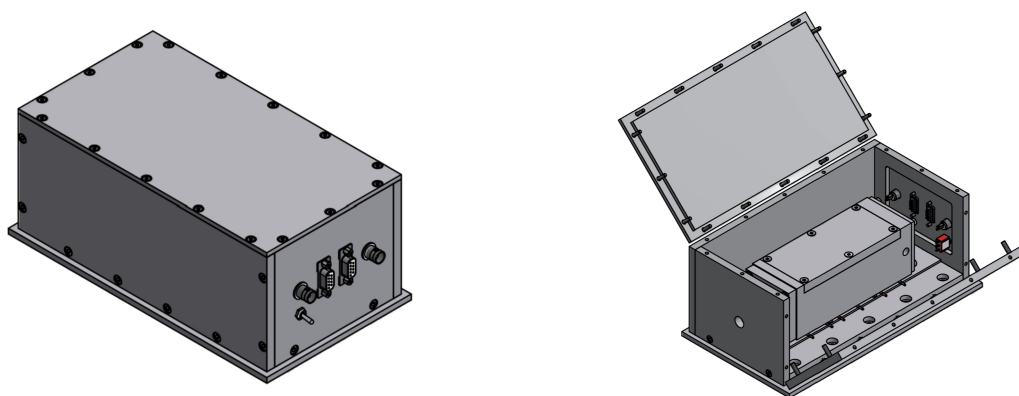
Technical sketches of the inner and outer housing for the self built laser
